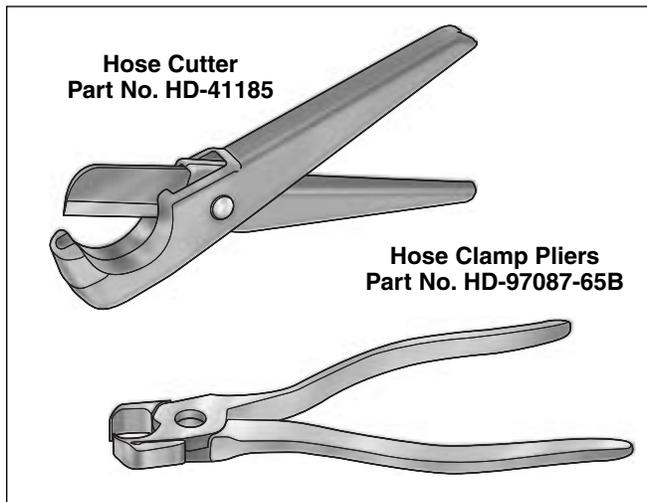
Hose Cutter/Hose Clamp Pliers
